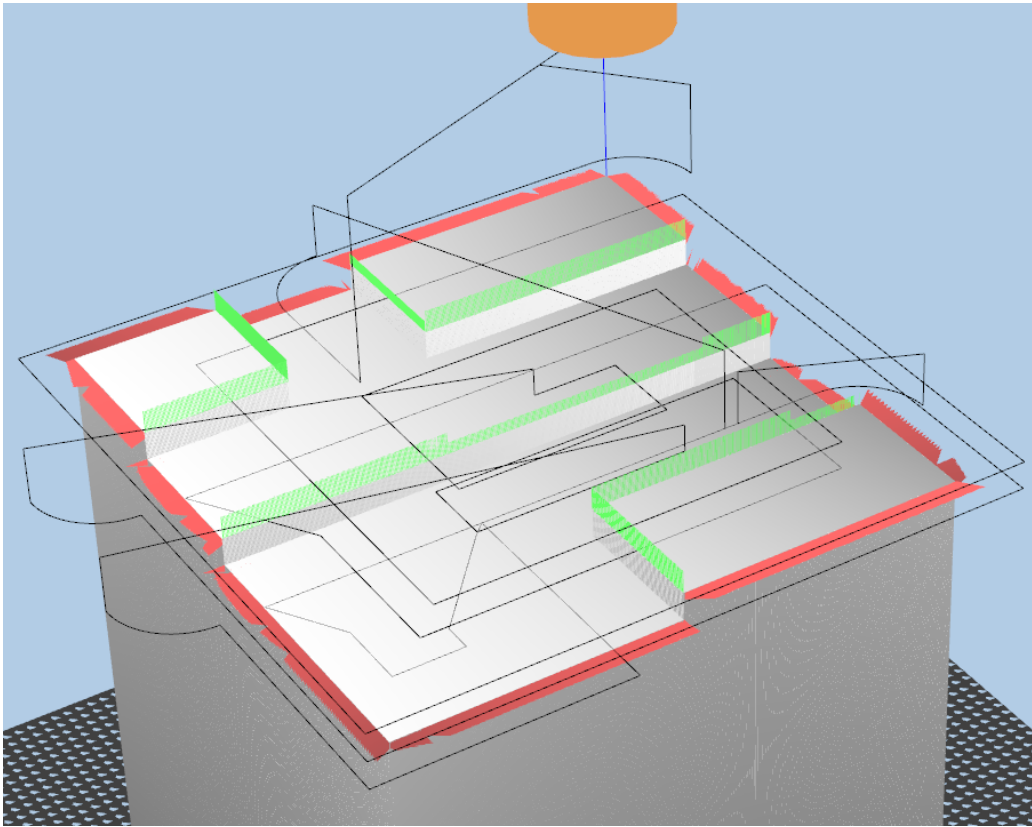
Tool path B in up milling (burr height = 800 μm).
